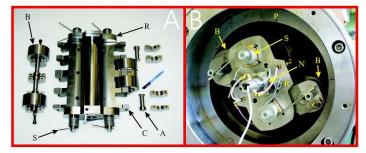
CBCP construction: (a) exploded view of the CBCP parts; (b) CBCP after mounting on the extended camshaft, and addition of the internal cams. (A) additional mass; (B) roller follower; (C) coupler; (N) nut; (P) internal cam; (R) rotor; (S) spring.
